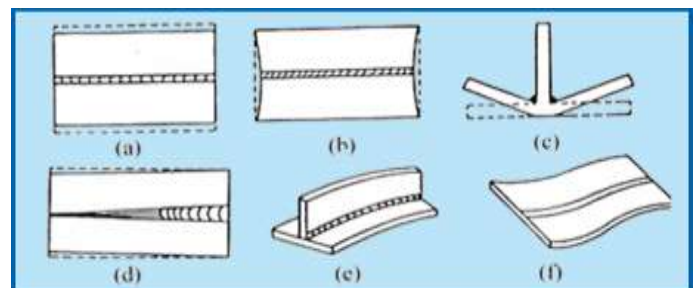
Types of distortion in fusion welding
